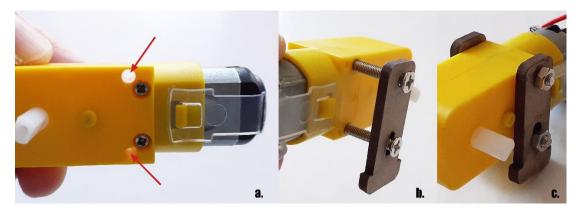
This image depicts the concept of how to assemble the gear on the chassis by using the fasteners. Each gear has two see-through holes (a.). You need to tie up both fasteners by using the two screws (b.) and the two nuts (c.).
